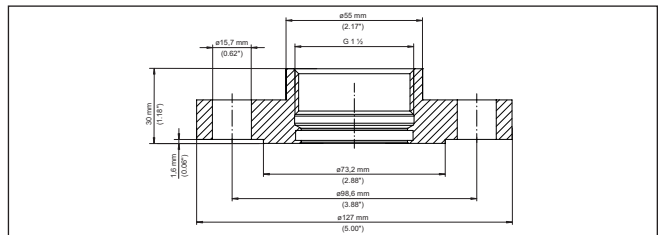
Dimensions of threaded adapter G1½ (DIN 3852-X) on flange 1½" (ASME B16.5, RF) 150 lb
